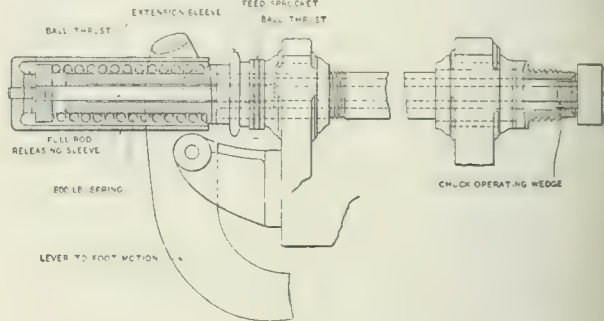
Details of the Open Only Outside Spring Chuck.
